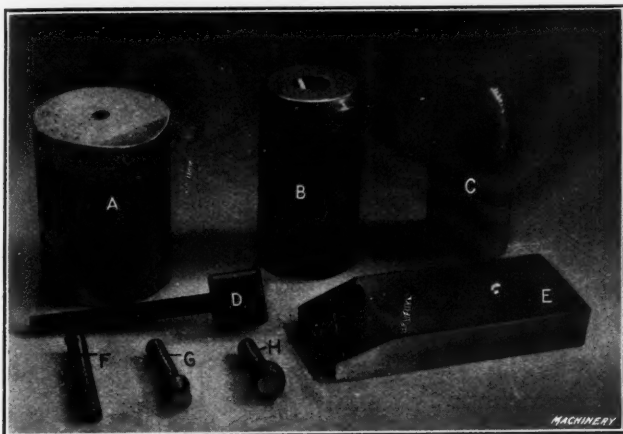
A Set of Heading Tools and Work from a Double-blow Cold-header
